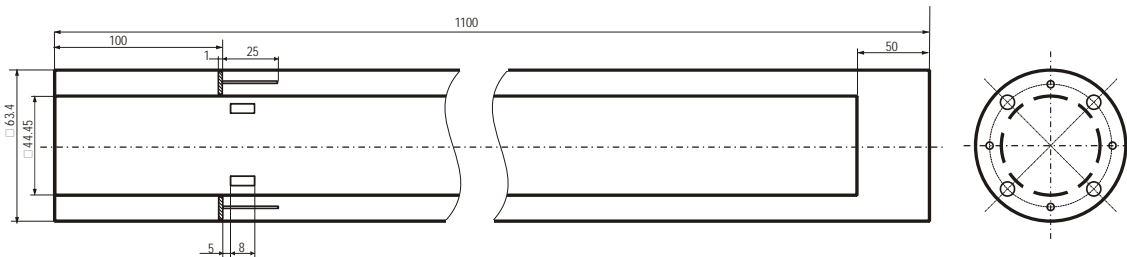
The principal layout of Radiant tube of GT1.0 type.
